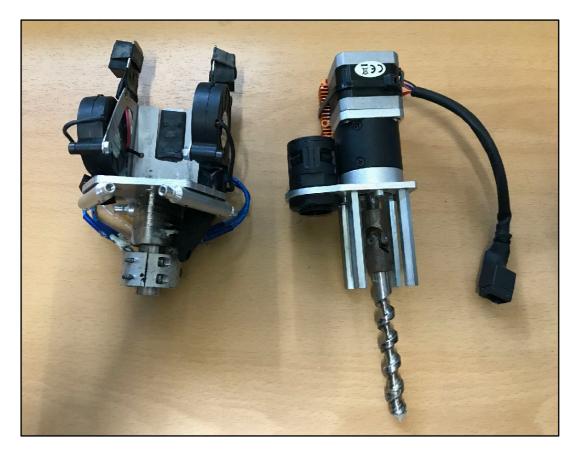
all components disassembled and sent to WASP headquarter for planned modifications.
